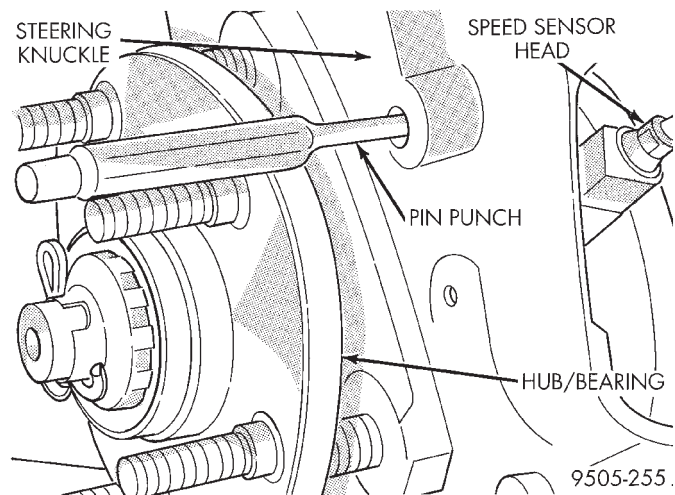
Speed Sensor Head Removal From Steering Knuckle
